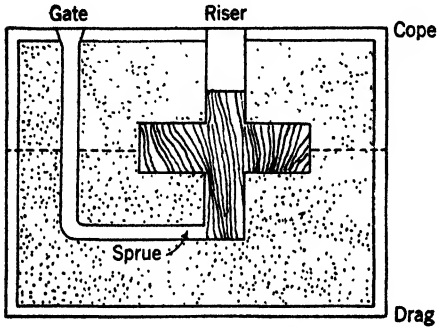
Sketch of Sand Mold Showing Pattern in Place.
